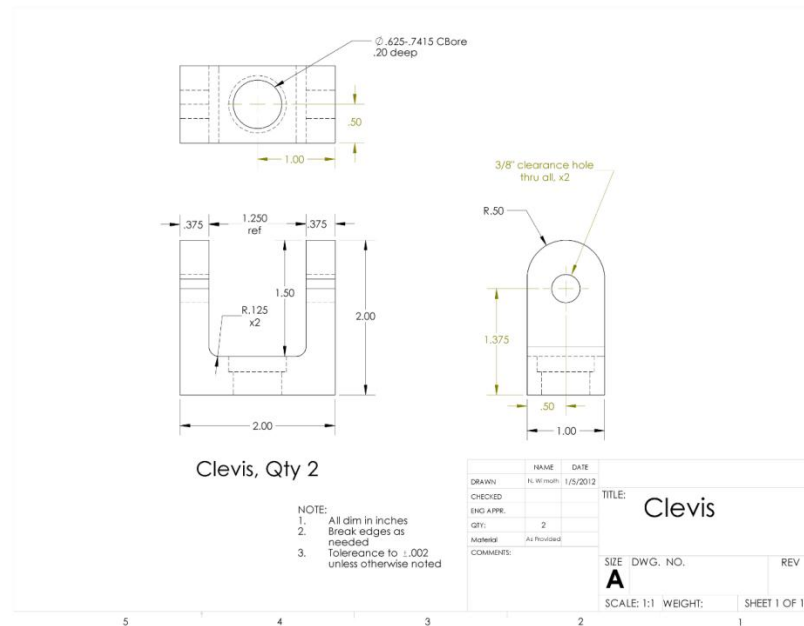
Clevis for Mounting the Clamshell Fixtures into the Test Frame
